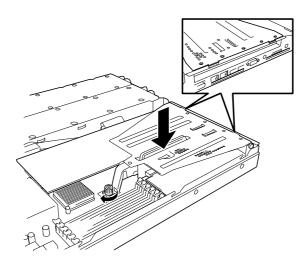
34: Inserting the Riser Card Assembly into the Motherboard
